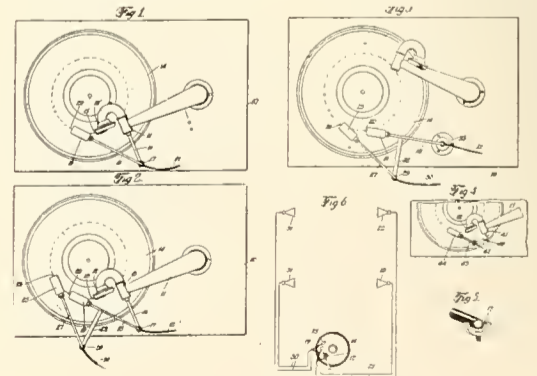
is a detail perspective view of universal joint which may be employed in connection with the mounting of the electrical reproducers. Fig. 6 is a diagrammatic view illustrating the manner in which sound may be distributed by means of the improved arrangement of reproducers.
